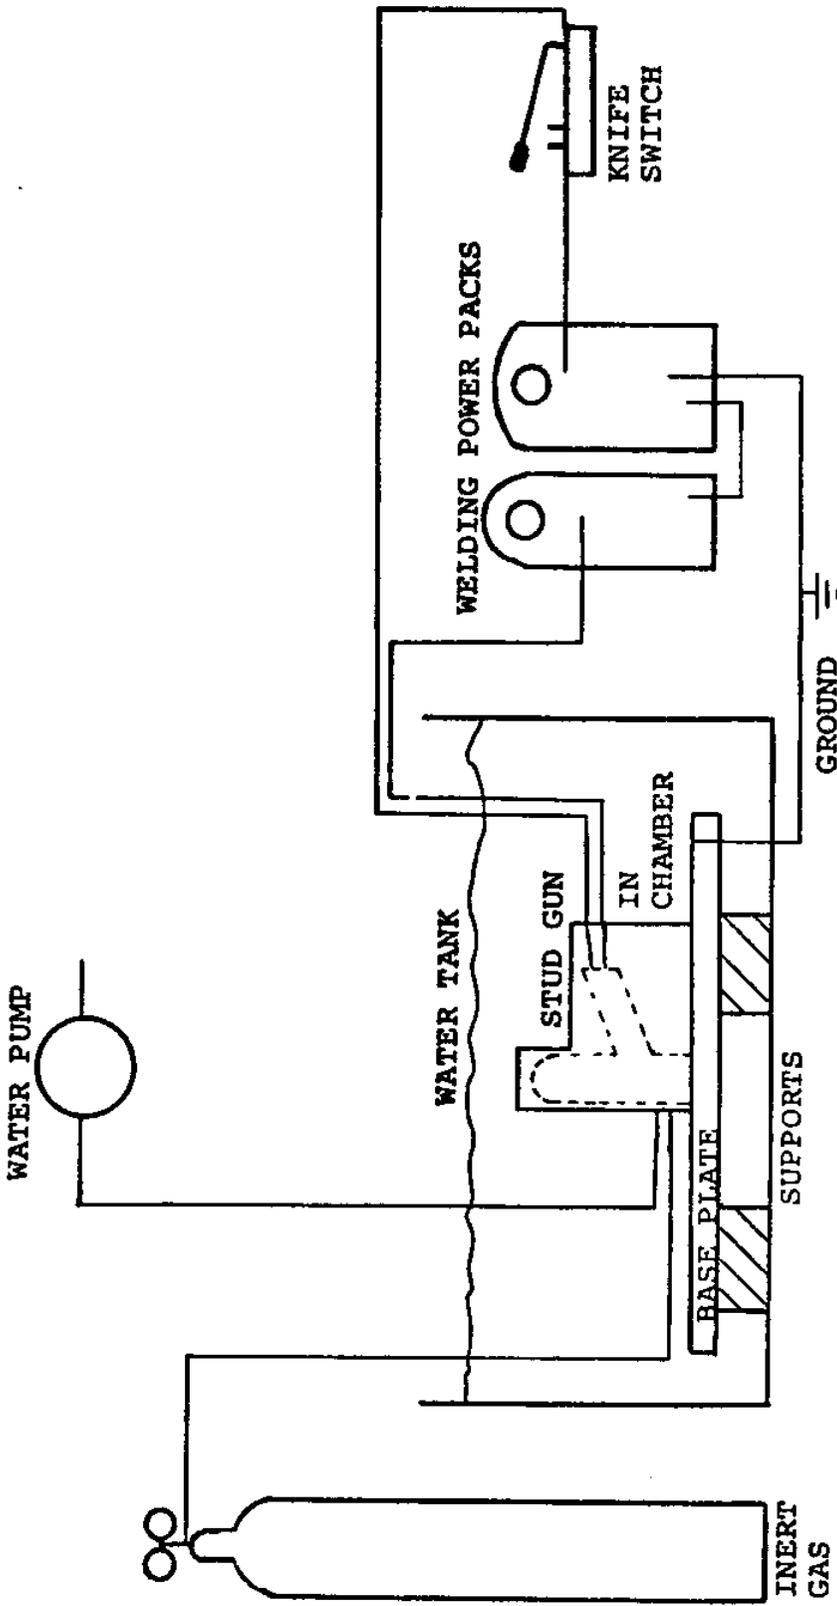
Schematic of underwater dry chamber stud welding apparatus
